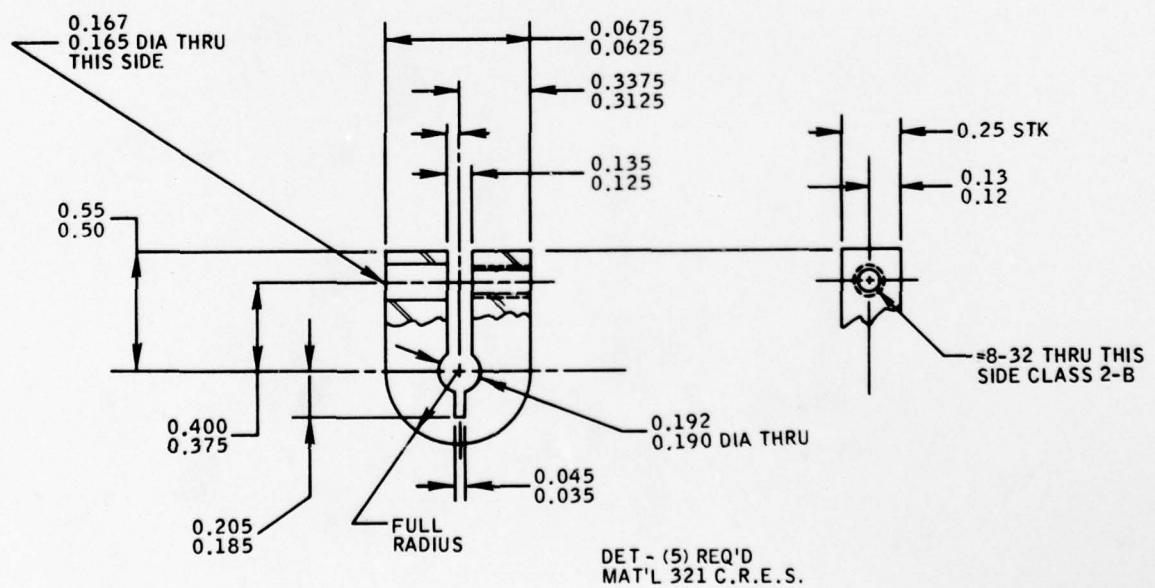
RSK 230786 - Collet Fastener for Ceramic Bolt
